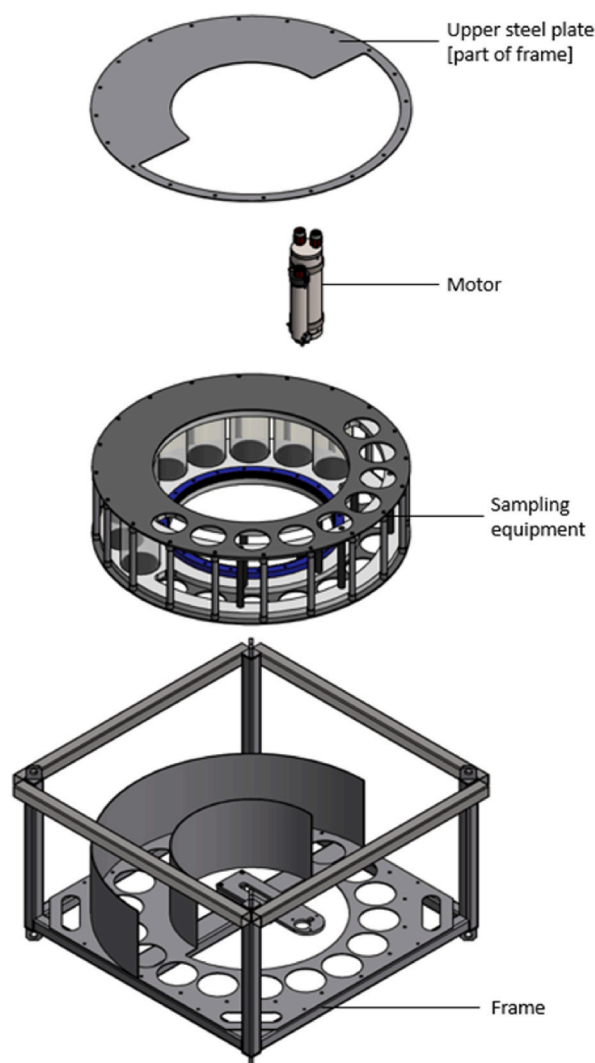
Top level exploded view of the OPIC assembly (single column image).
